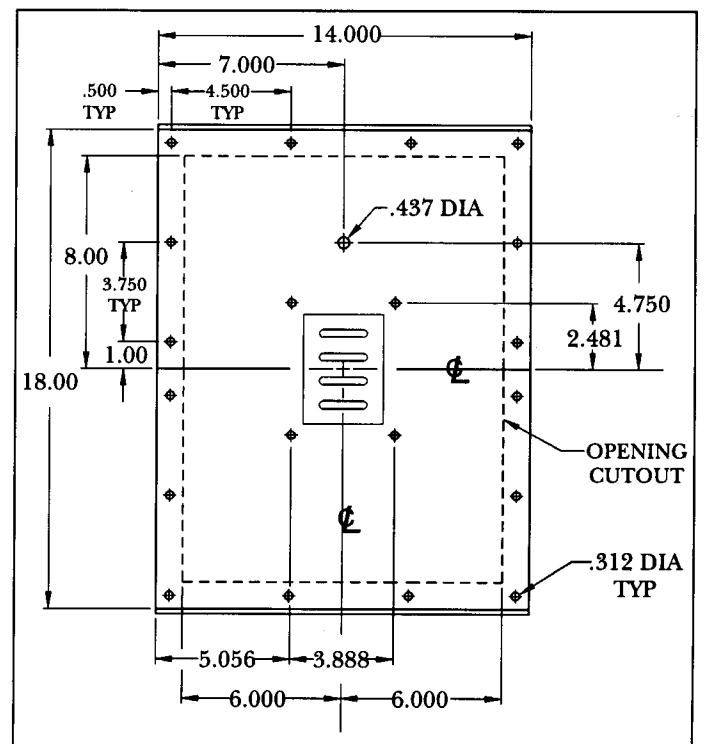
Flanged End With Lugs - Cutout and Hole Drilling Pattern
